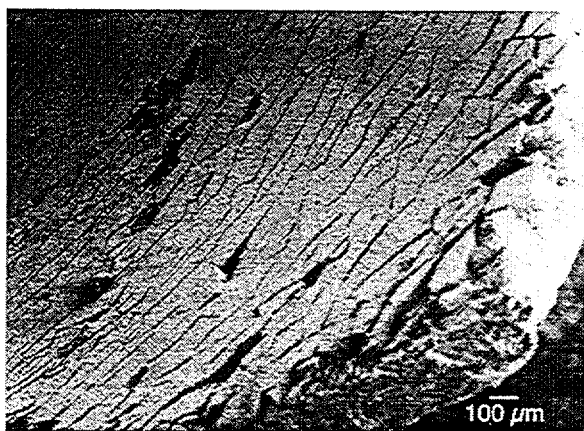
Inner surface of sample MT1, showing fracture of intermetallic phases.
